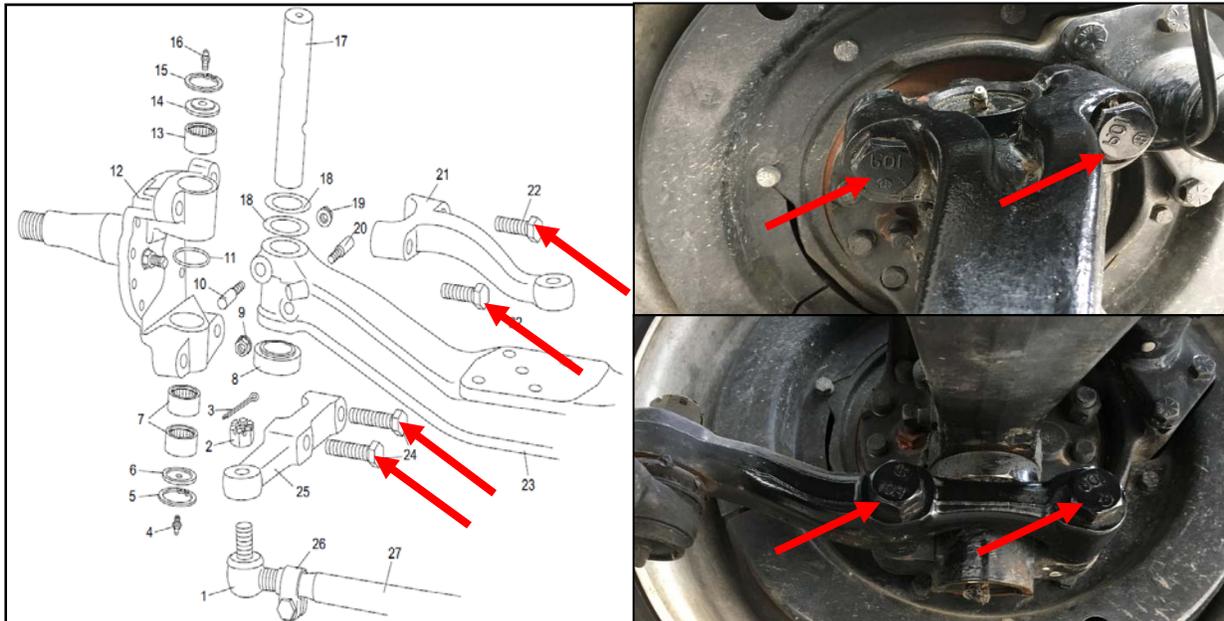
Steering Arm and Tie Rod Arm Capscrew Location
